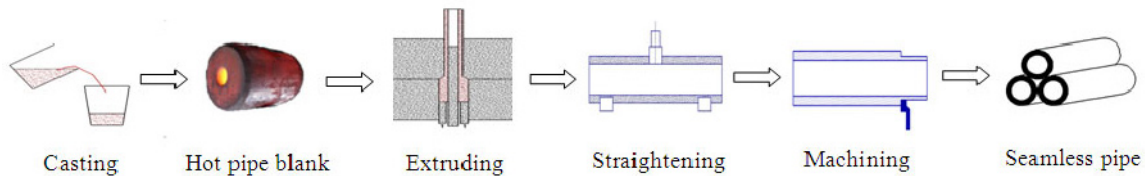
Casting-extruding continuous forming process for producing large-scale thick-walled pipe
